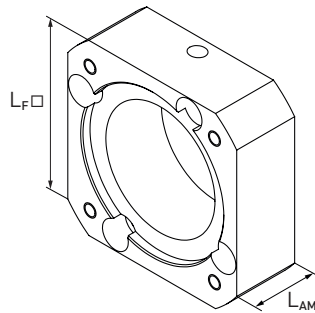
Motor adapter plate AM for linear modules HM-S and linear tables HT-S
